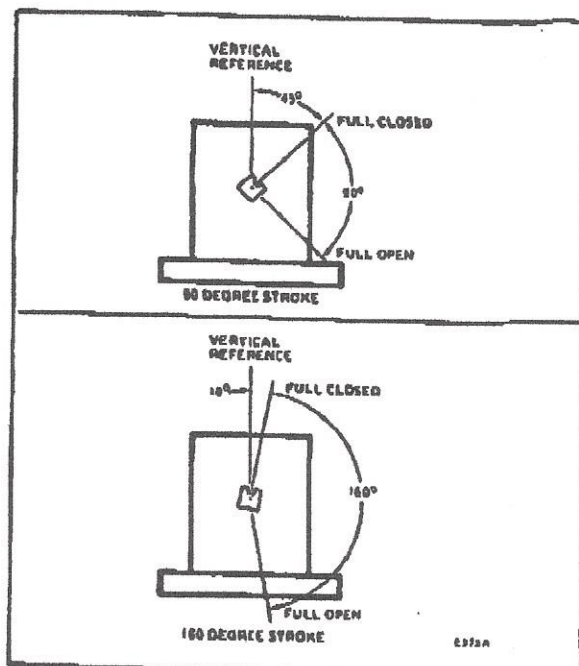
MOTOR SHAFT POSITIONS AT LIMITS OF STROKE—VIEWED FROM POWER END.
